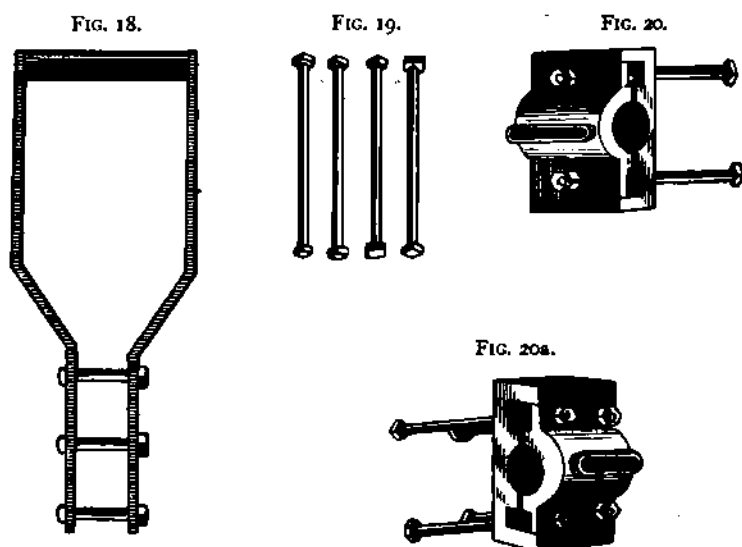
Bolts for securing this by a wooden cap to walking beam.
